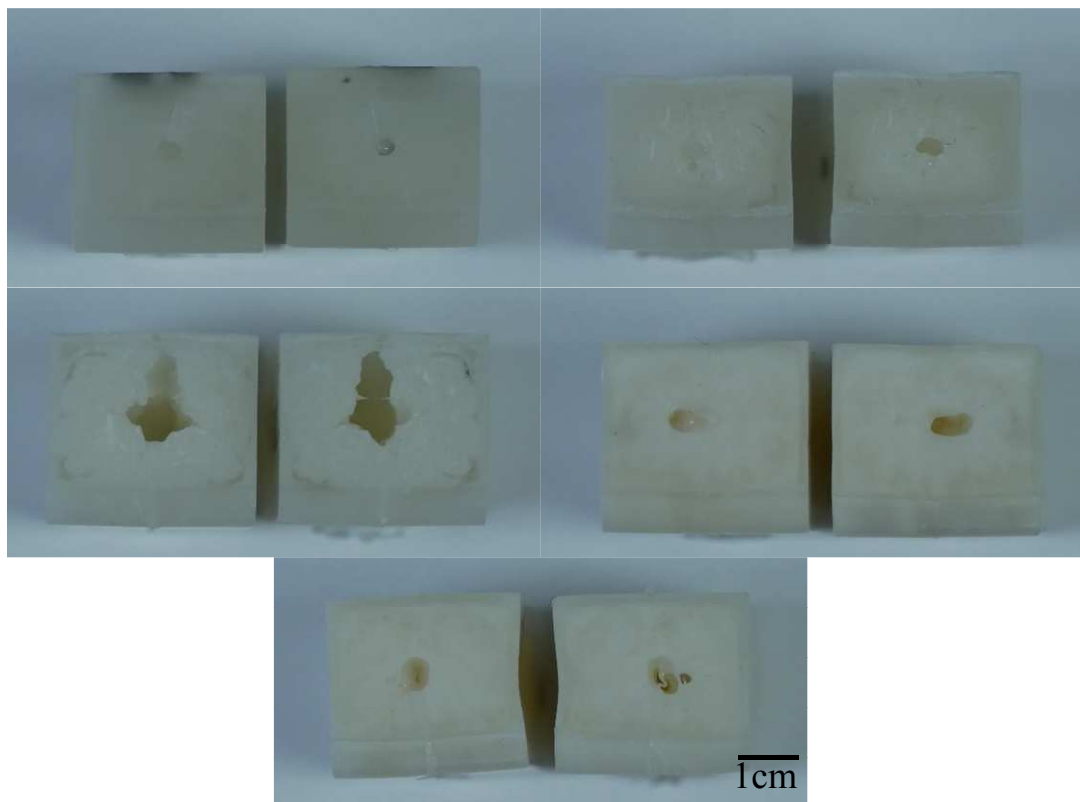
Images of injection molded SEBS and TPU specimens with voids.
